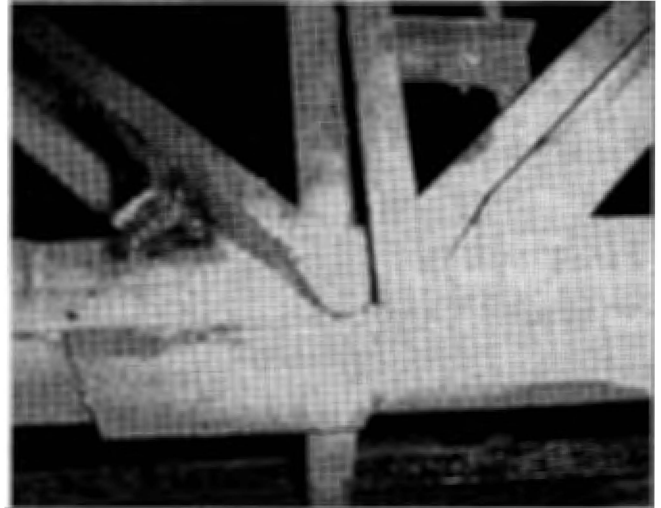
Damage of main girder of overhead travelling crane.
